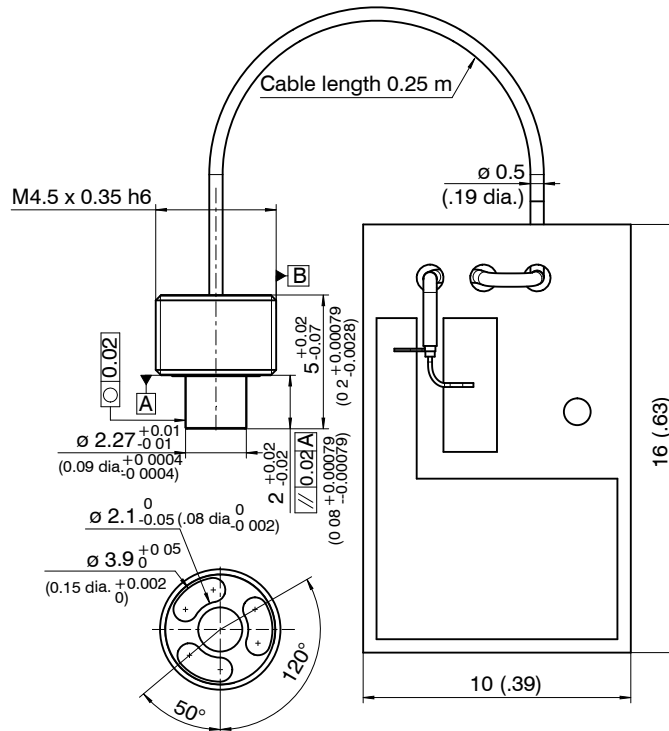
Sensor dimensions LS04(04) with integrated sensor cable, dimensions in mm (inches), not to scale
